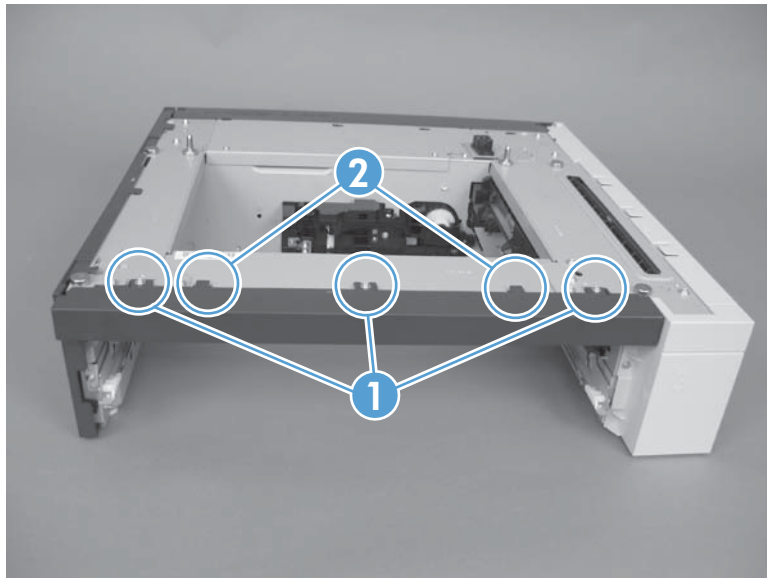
Remove the right cover (500-sheet paper feeder) (2 of 2)
